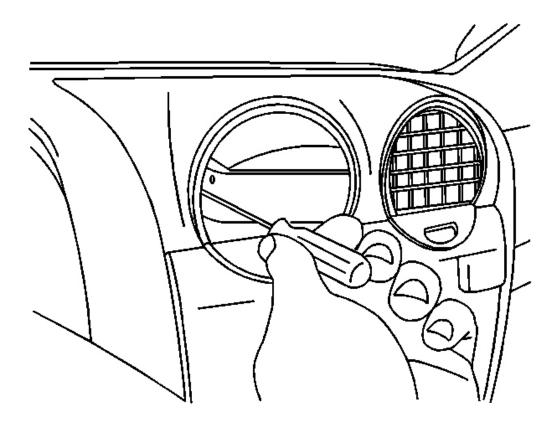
Removing/Installing Left Side Of Air Outlet At Housing Assembly Courtesy of GENERAL MOTORS CORP.
